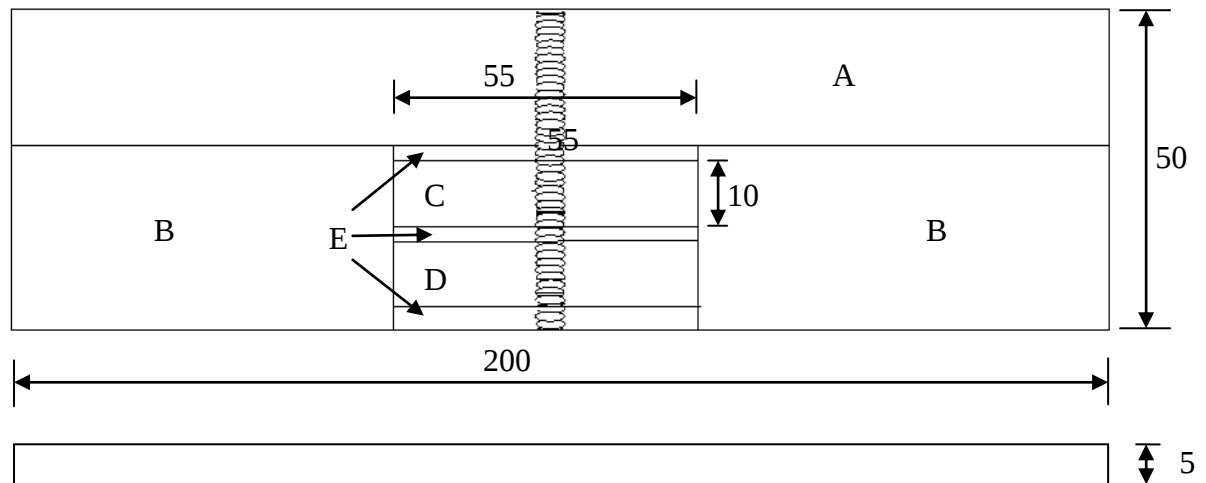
Marking and cutting of plates after welding (All dimension are in mm)
